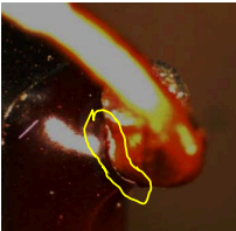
Solder bead on TCO lead from Sub 64 after second Lock-Rotor Test
